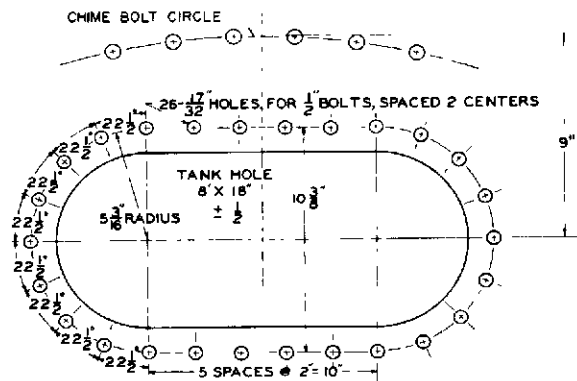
Bolting Pattern for 8-In. x 18-In. Oblong Thief Hatches, Pressure-Relief, and Vacuum-Relief Valves
